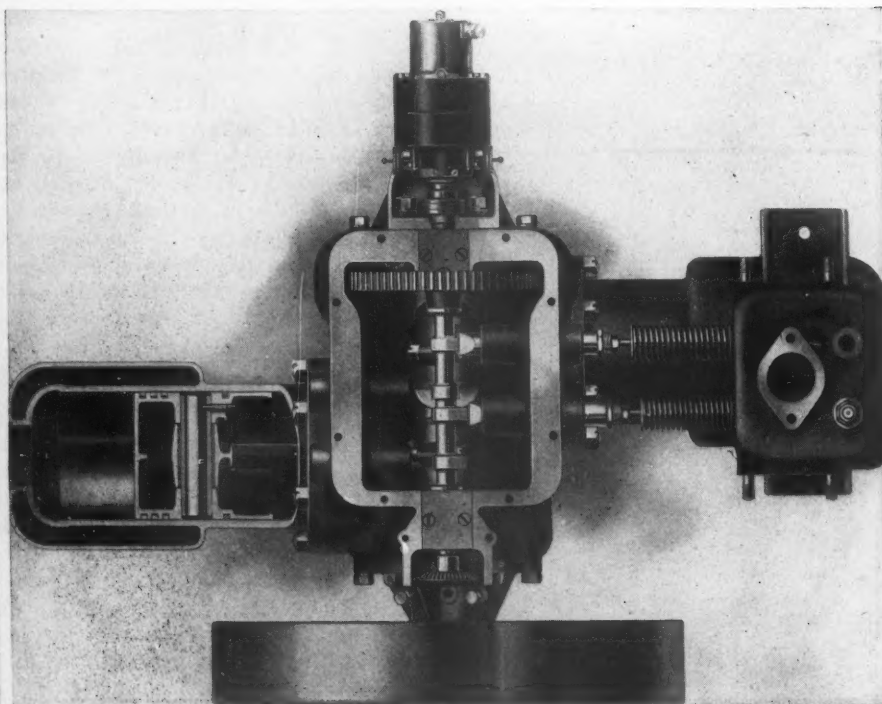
TOP OF MOTOR, CRANKCASE REMOVED AND ONE CYLINDER IN SECTION
